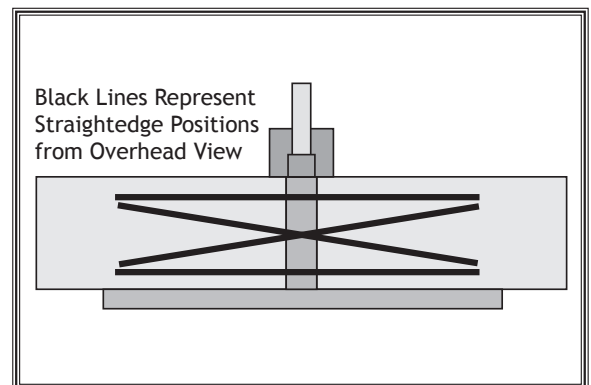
Straightedge positions for checking infeed/outfeed table parallelism.
